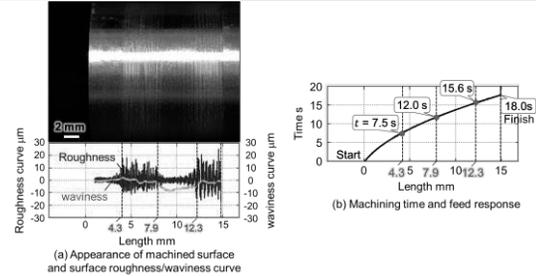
Machined surface and machining time in machining test with respect to increasing spindle rotation speed.
